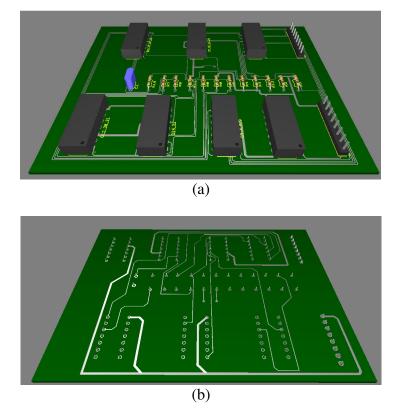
(a) Top Layer View of the Instructor/Fabricator's PCB Design. (b) Bottom Layer View of the PCB Design
